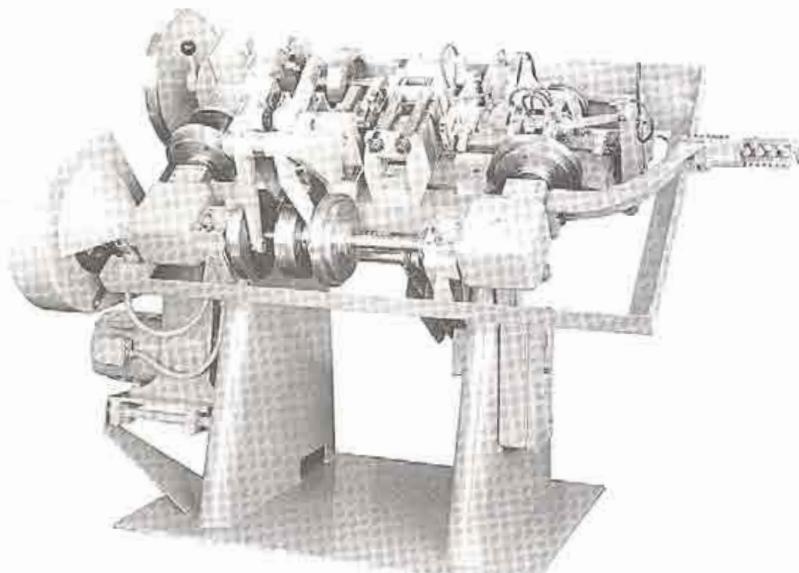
Multislide machine with guards and covers removed. (Courtesy of U.S. Baird Corporation, Stratford, CT.)
